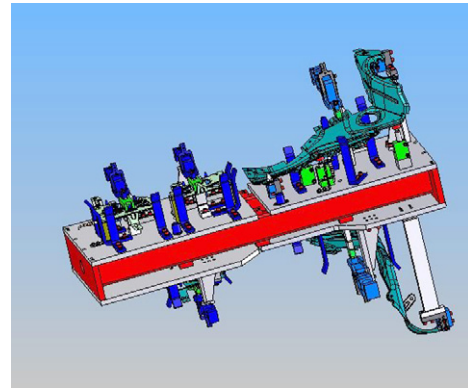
Automotive stud weld fixtures on a trunion frame, (DBM innovation inc.) [22].
